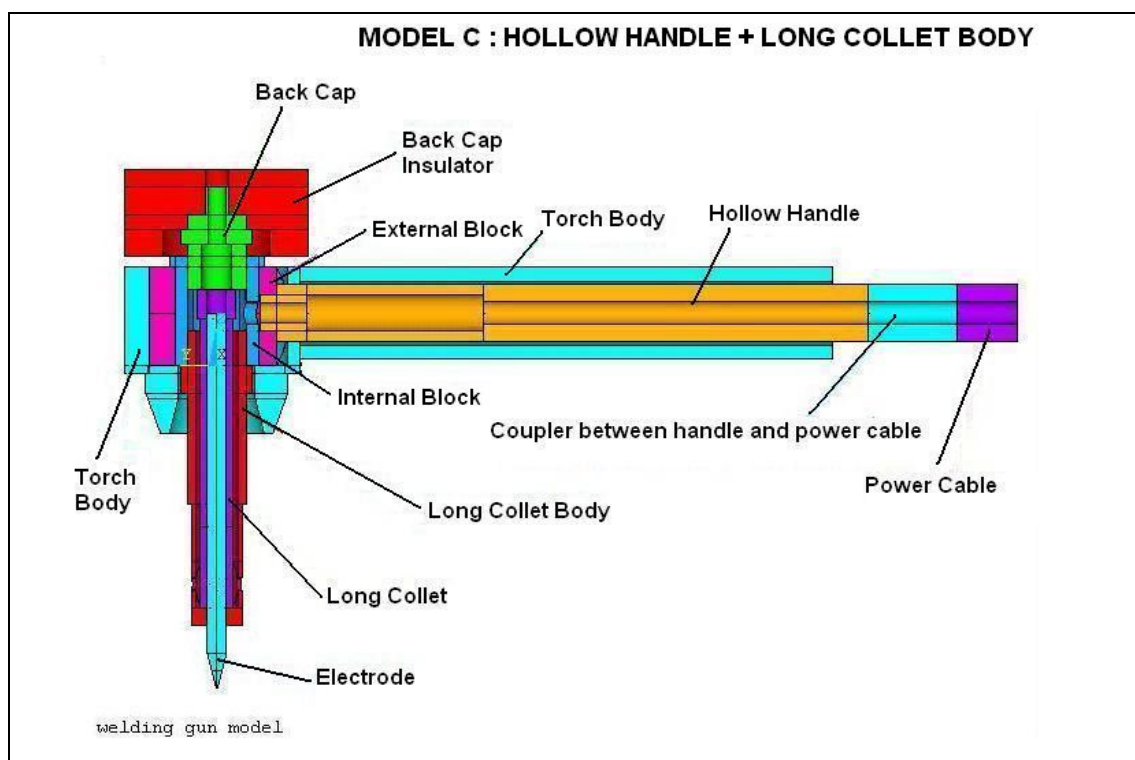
Cross-sectional view of welding torch model C.
